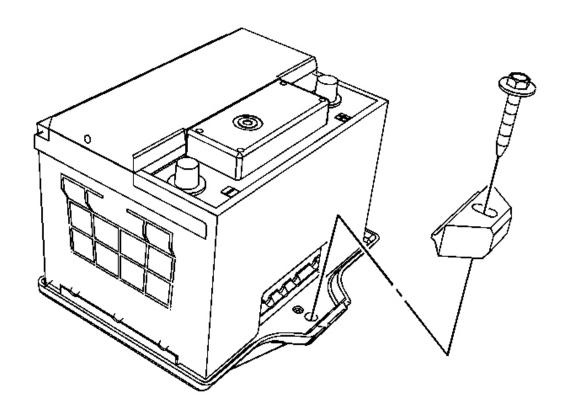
View Of Battery, Hold Down Retainer & Bolt Courtesy of GENERAL MOTORS CORP.
